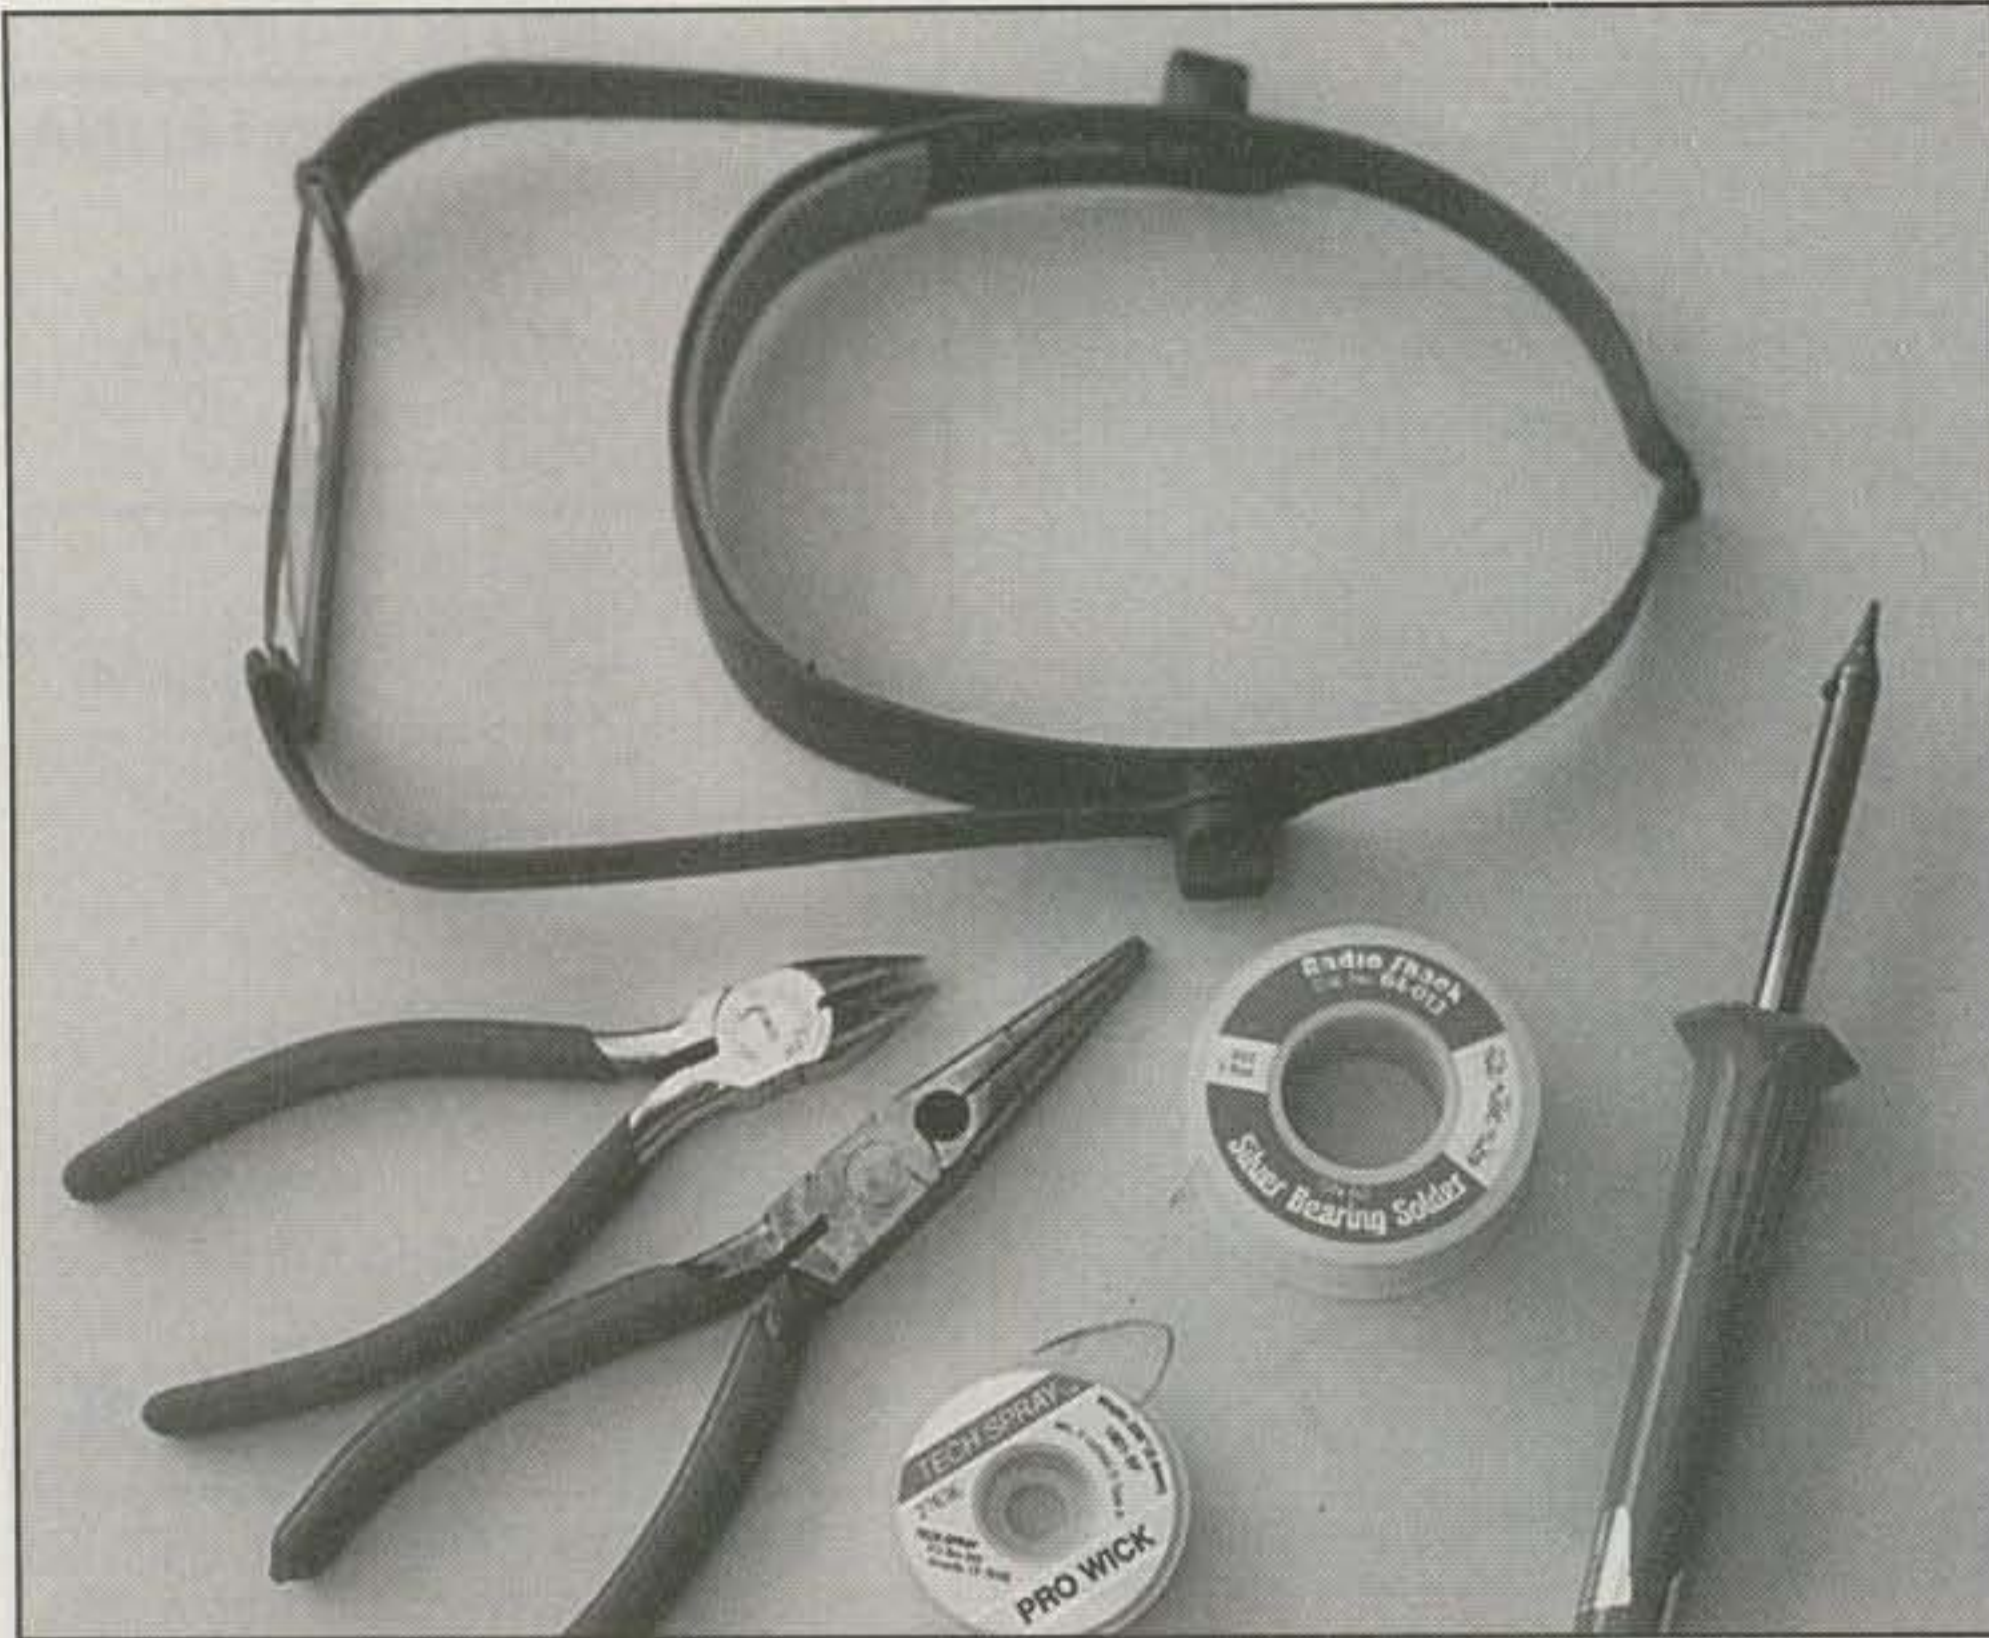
Some beneficial tools and accessories for easy homebrewing small projects include a low-wattage soldering iron, thin silver-bearing solder, a desoldering wick for correcting mistakes, and a pair of slip-on “Mag Eyes” type magnifiers.
